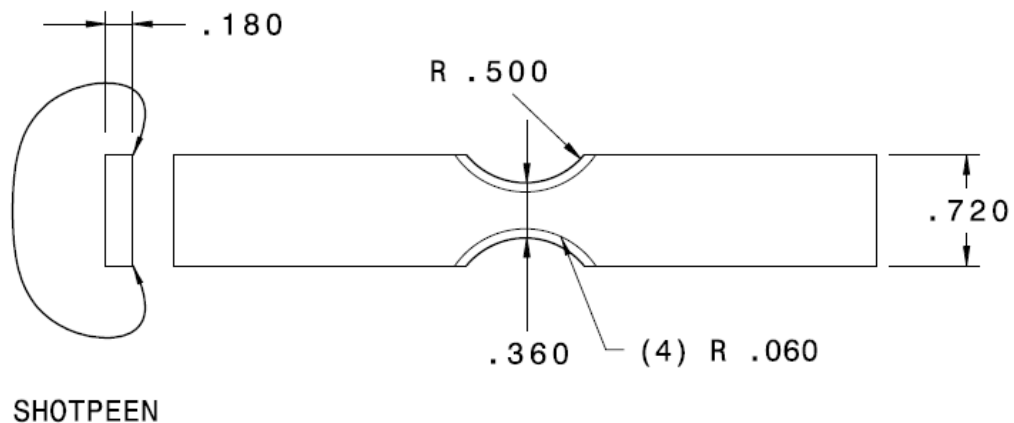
Drawing of flat continuous radius gage specimen for improved grain level interrupted DIC
